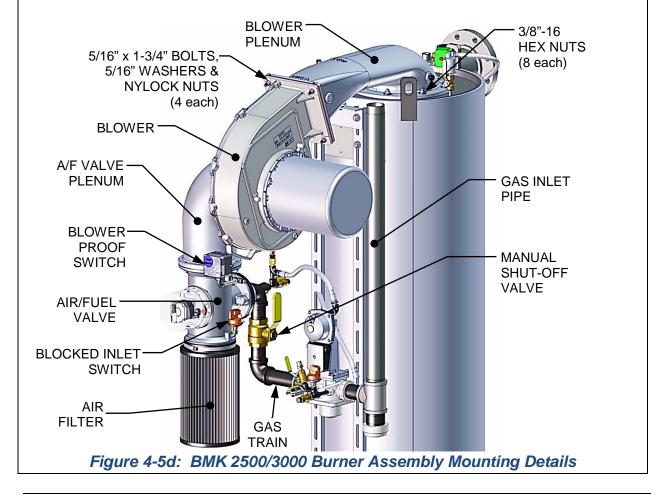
BMK 2500/3000 Burner Assembly Mounting Details
